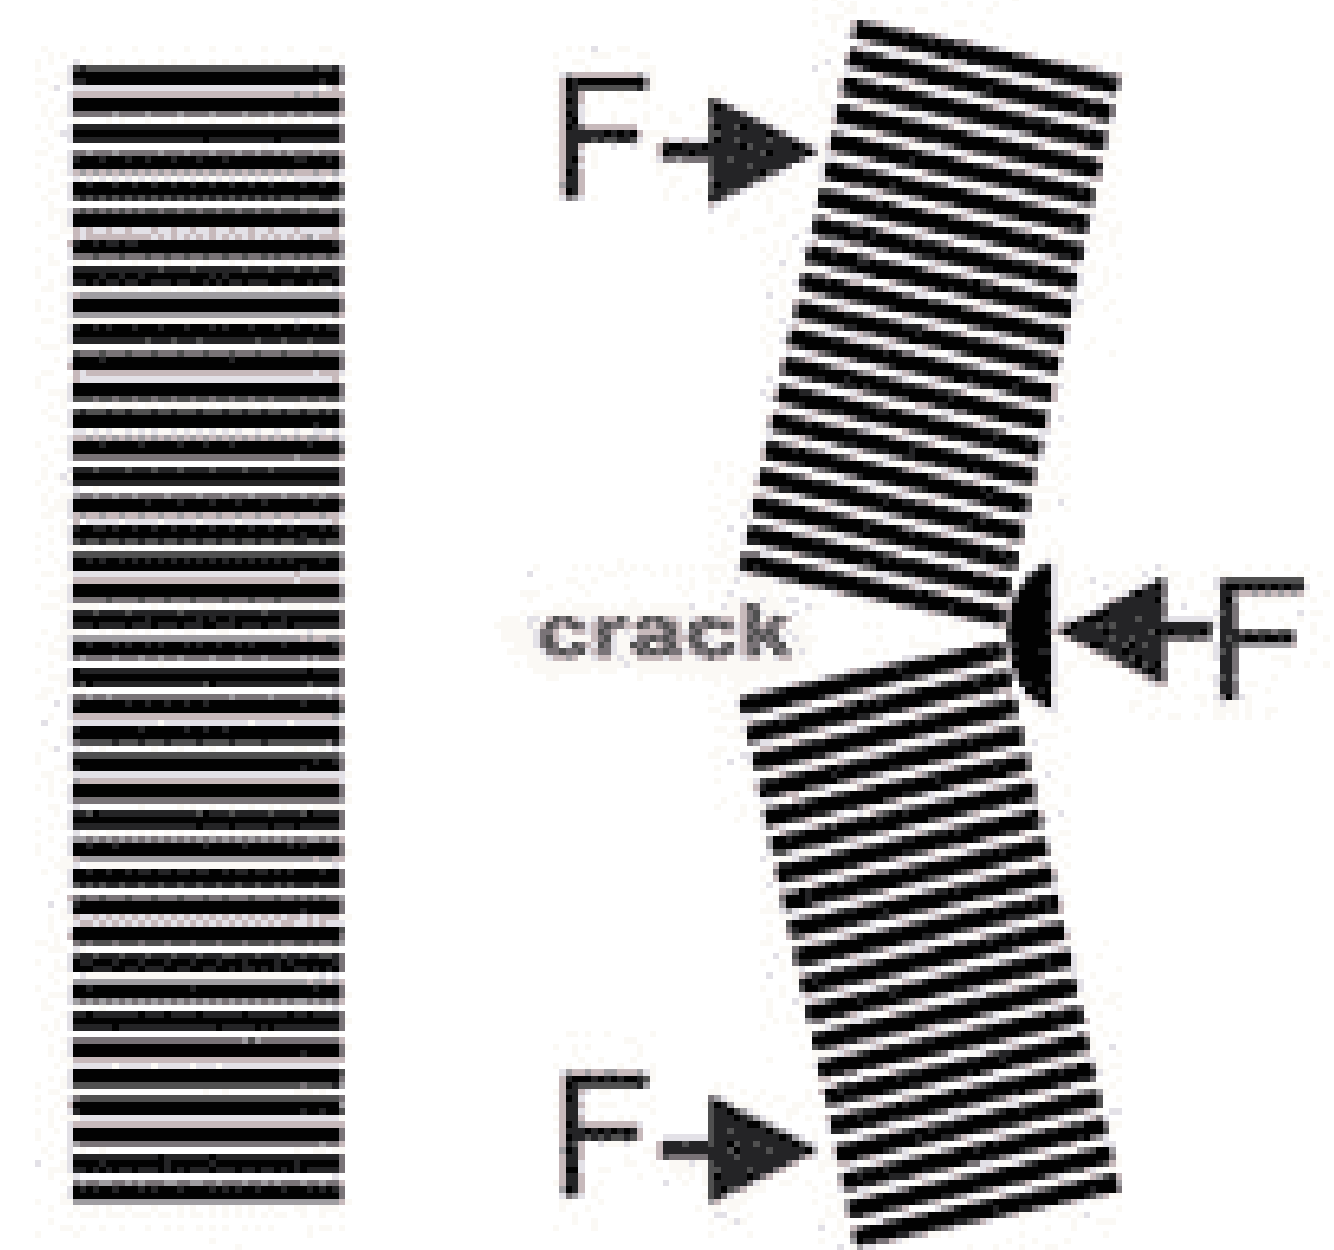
Cracking of 3d prints (FACFOX, INC., 2019)
